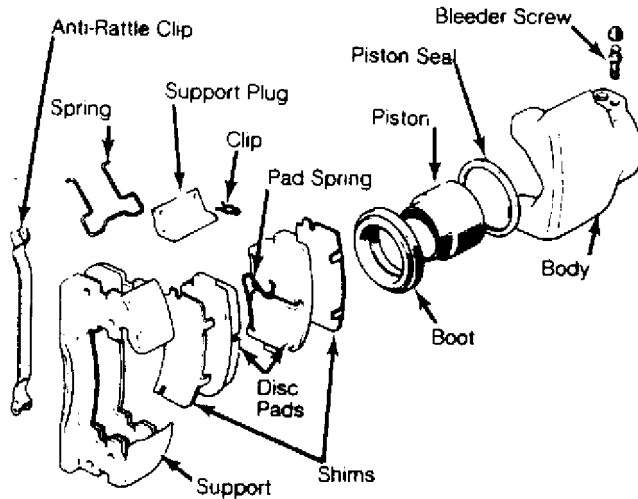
Exploded View of Pickup Front Disc Brake Caliper
